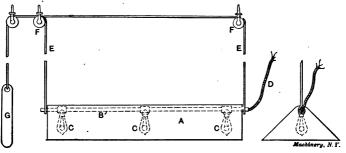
Adjustable Light Holder for the Drafting-Room.
